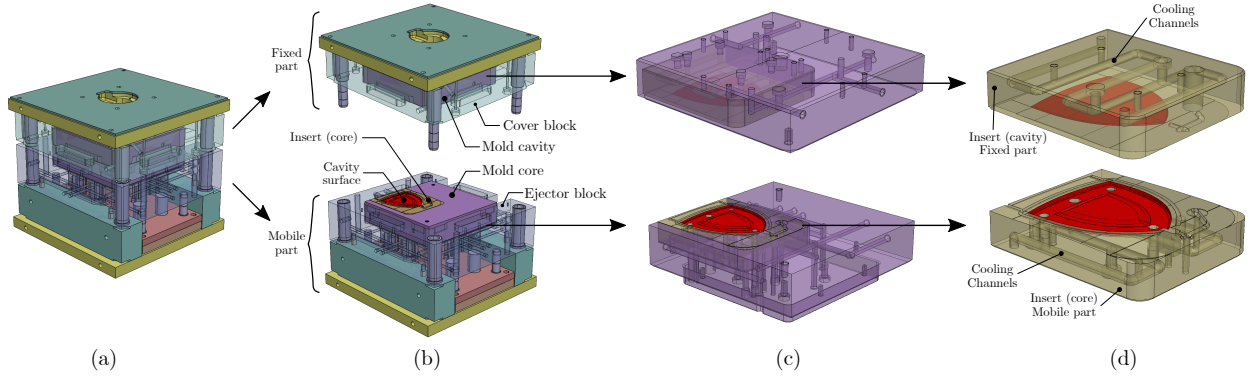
Mold of the produced plastic part: (a) injection mold assembly, (b) fixed and mobile parts of the mold, (c) mold's cavity and core with their respective CC and insert halves, and (d) the insert halves with the CC disposition.
